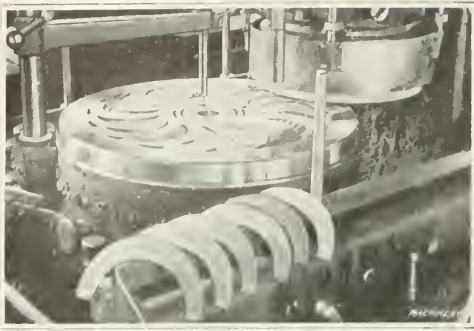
Method of holding and grinding Micrometer Frames on Blanchard Vertical Surface Grinder
